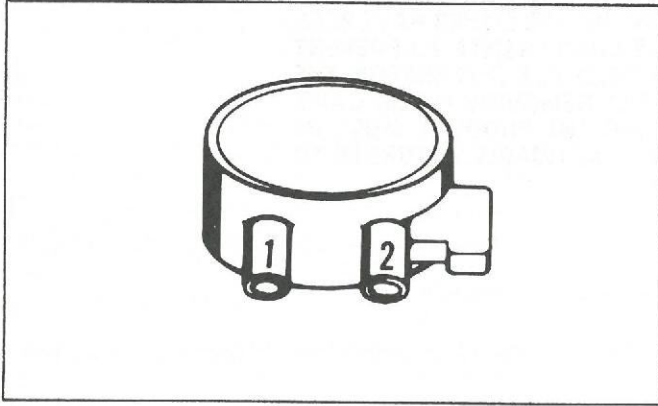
C-2 Differential Vacuum Delay Valve – VIN 8 and Y
